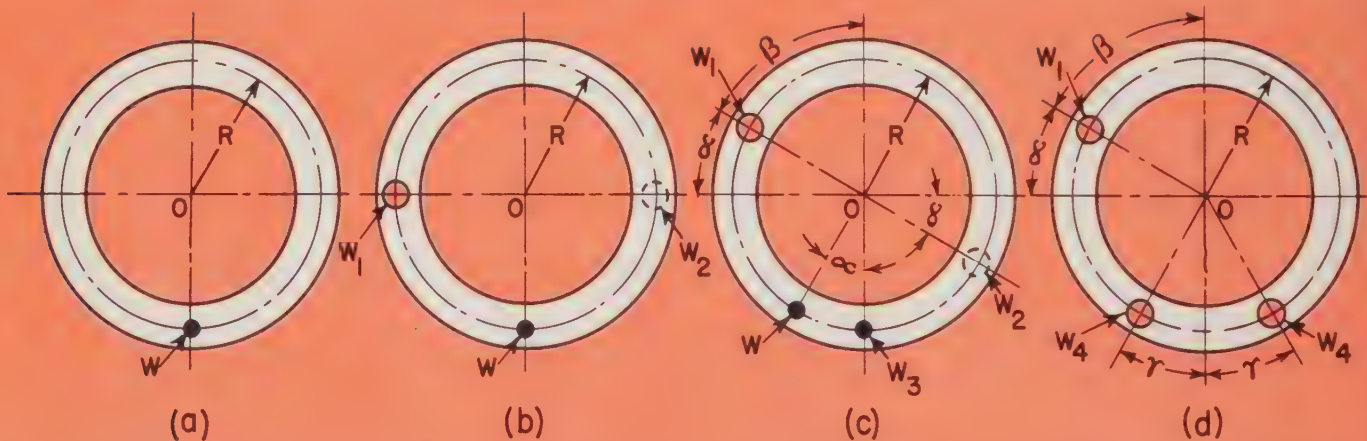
When the speed cup and spindle are placed on oscillating bearings, the heavy side of the cup  $W$  rotates downward and rests at the bottom (a). One hole is then punched on the horizontal centerline of the cup and at right angles to the cup's heavy side. The punched hole removes a weight  $W_1$  from the cup which is equivalent to adding an equal amount of weight  $W_2$  on the opposite side (b). After the first hole is punched, the cup rotates through an angle  $\alpha$
